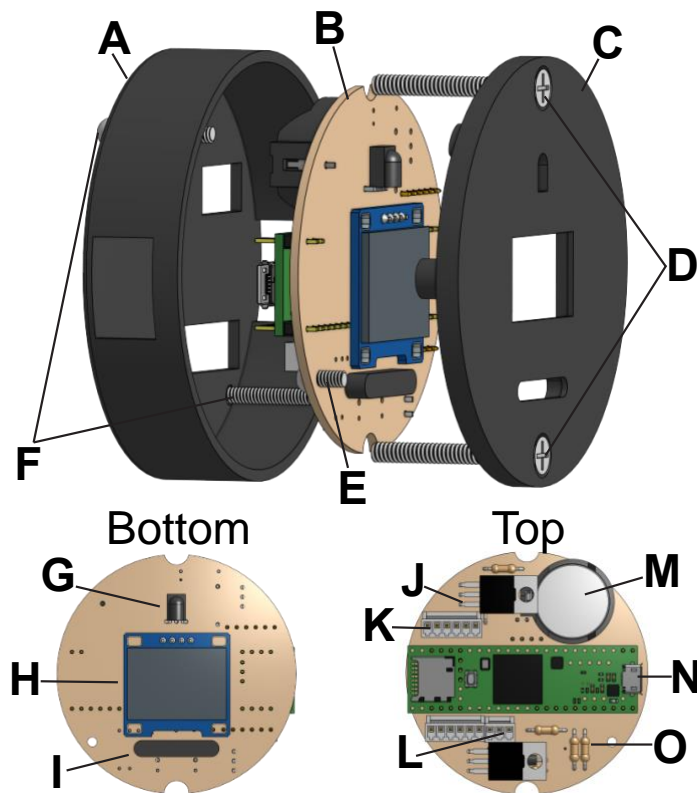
The 3D-printed circuit board housing (A) holds the SASE circuit board (B) and the UI components are visible through the 3D-printed faceplate (C). The whole housing is mounted on the main armature with two #6-32 bolts (D), while one #4-40 bolt (E) secures the circuit board to the faceplate, and two #4-40 bolts (F) hold the housing together. The circuit board is labeled to show the top and bottom and all PCB components are labeled as follows: IR receiver (G), OLED (H), reed switch (I), N-channel MOSFET (J), Molex 6-pin connector (K), Molex 3 pin connector (L), coin cell battery (M), Teensy 3.5 (N), resistors (O). Not visible are the two diodes below the MOSFETs that control current flow for the motor circuits.
